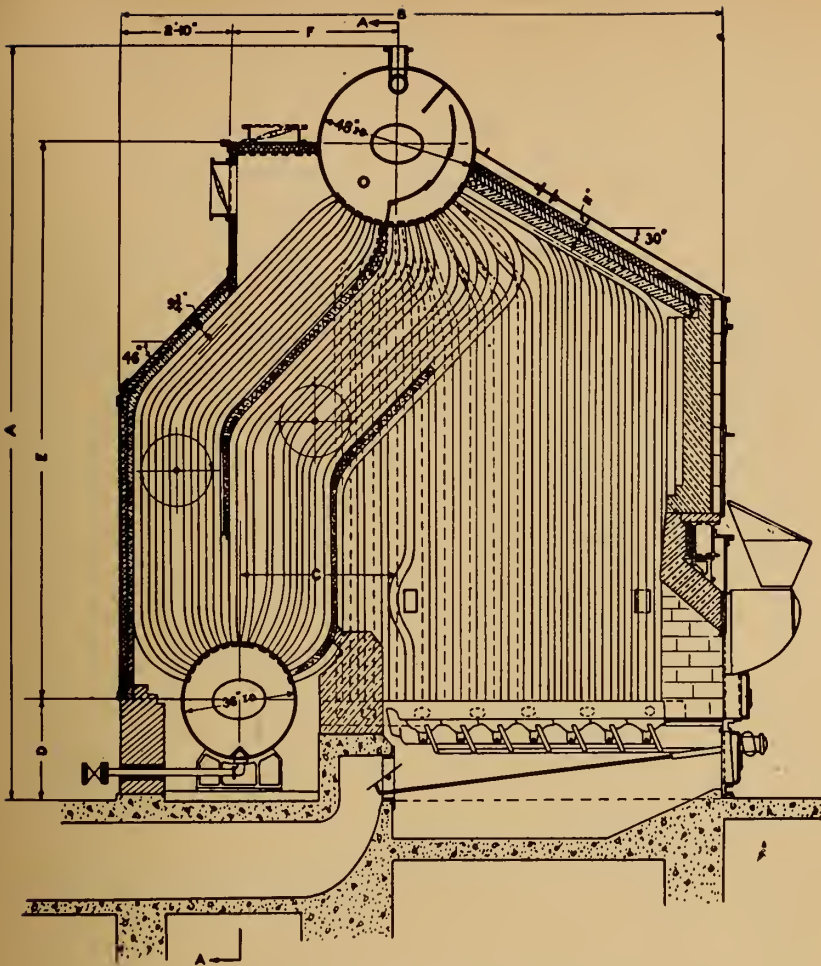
Water tube boiler, cross drum type, spreader stoker.
